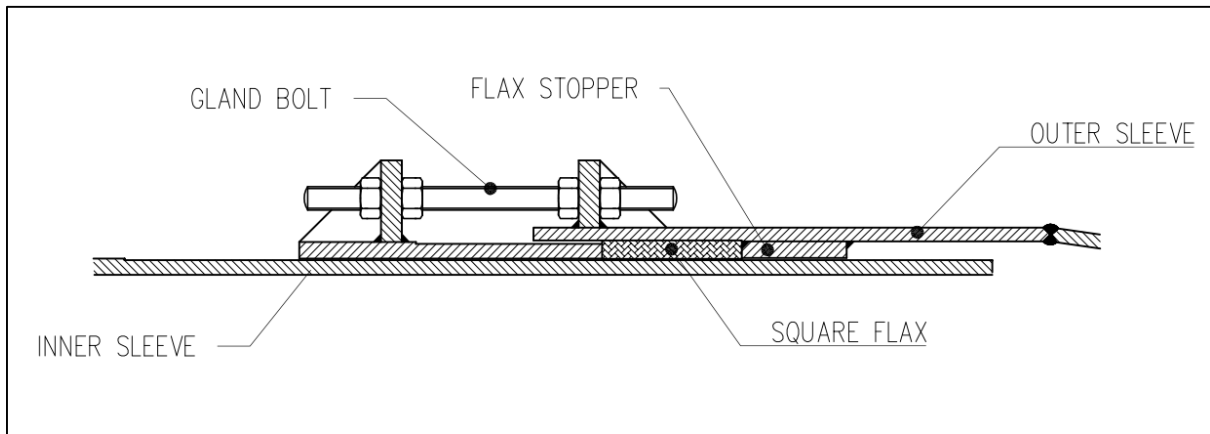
Schematic Drawing of Sleeve Type Expansion Joint
